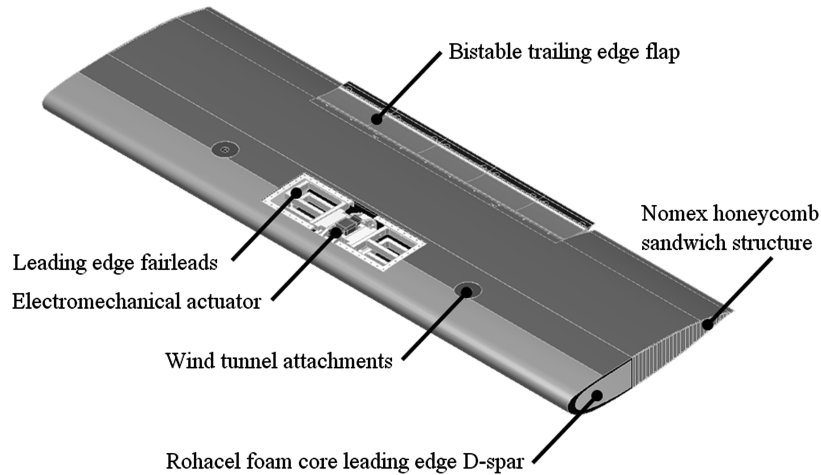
Lower surface of IRCS bistable airfoil (actuator access panel removed).
